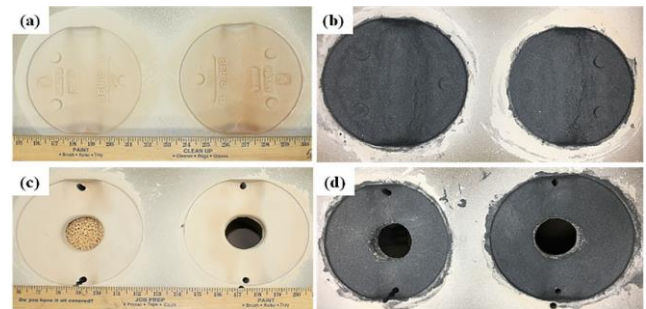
Butterfly valve molds for industrial casting. (a, c): Bare and cleaned surface coated with zircon; (b, d): multi-element powder-coated mold surface using sodium polyacrylate.
